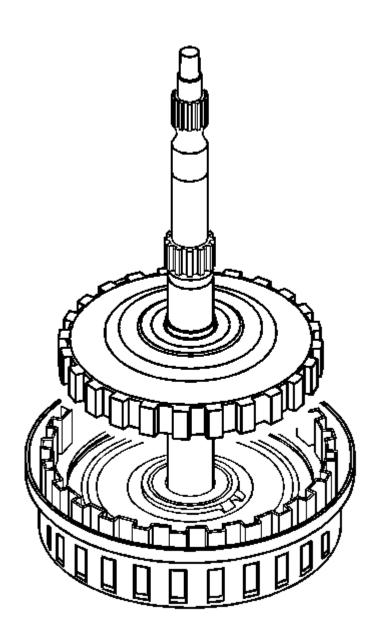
Replacing 1-2-3-4 and 3-5 Reverse Clutch Bearing Assembly Courtesy of GENERAL MOTORS CORP.
